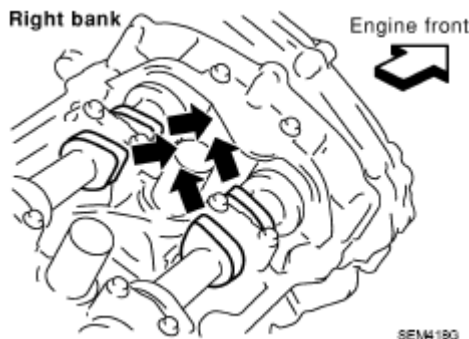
Identifying Intake And Exhaust Cam Noses On No. 1 Cylinder (Engine Front Side Of Right Bank)
